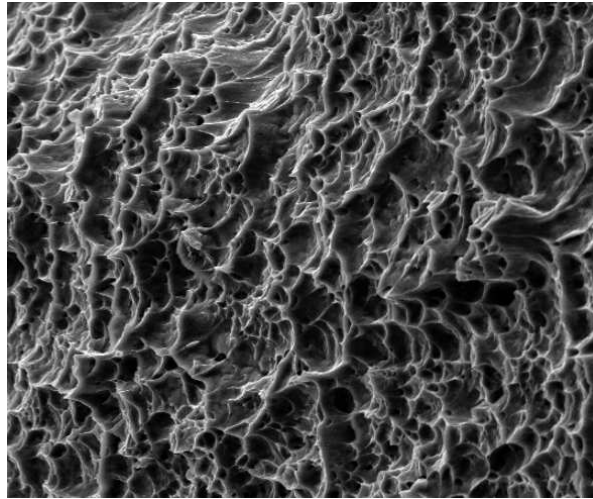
SEM picture of the fracture surface of machined X specimen
